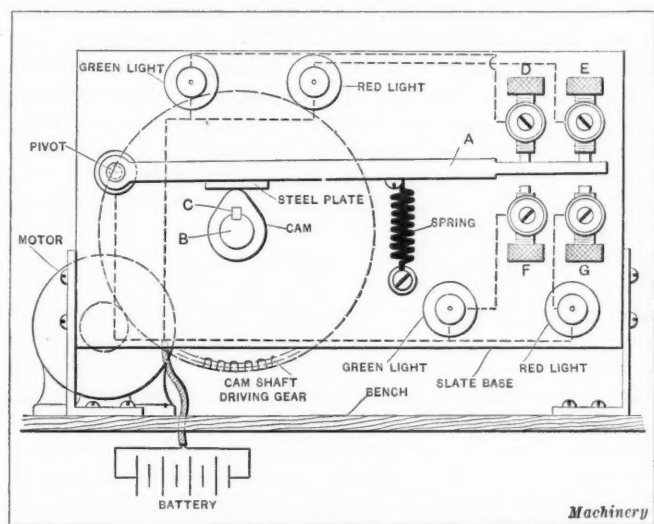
Cam Testing Fixture: Heavy Broken Lines Indicate Concealed Wiring
